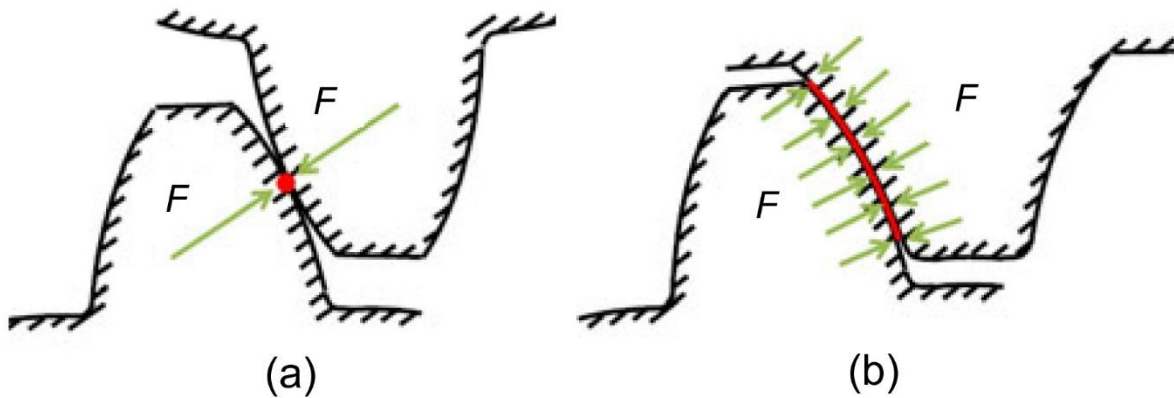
Gear tooth Mating (a) vs Involute spline shaft Mating (b) [21]
